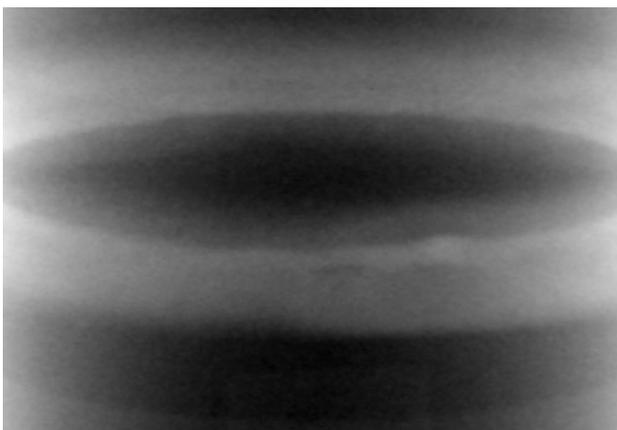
DR image of a weld defect – Lack of fusion
